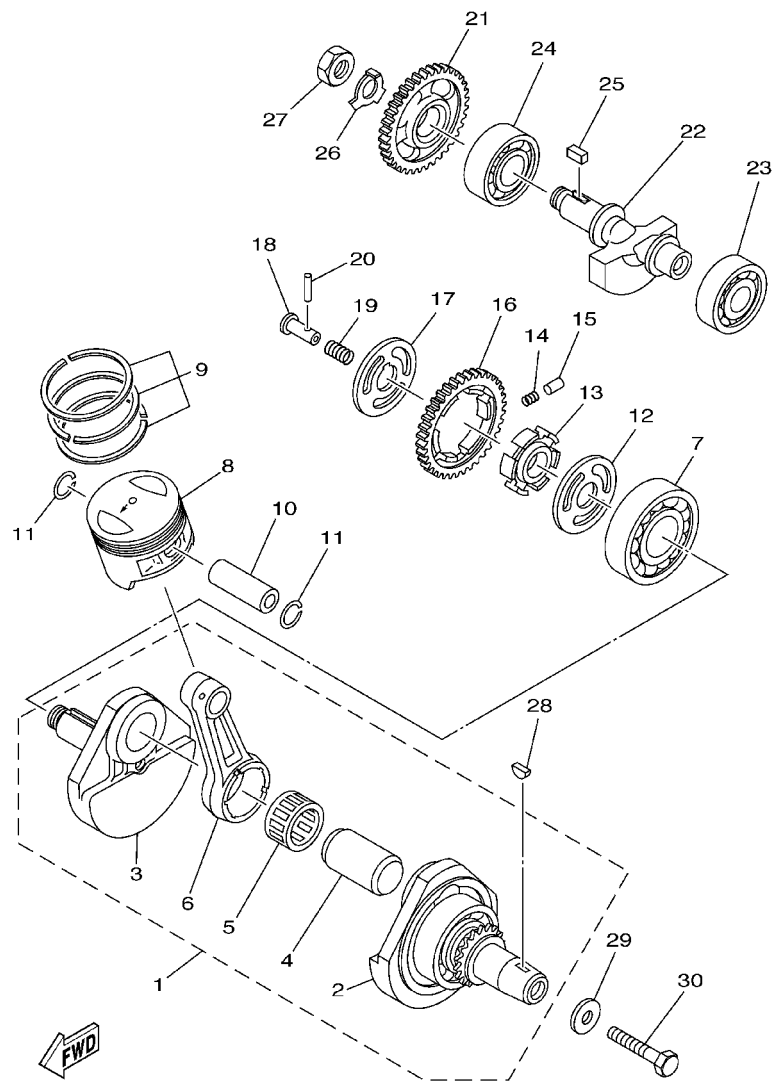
CRANKSHAFT. PISTON CIGUENAL. PISTON
